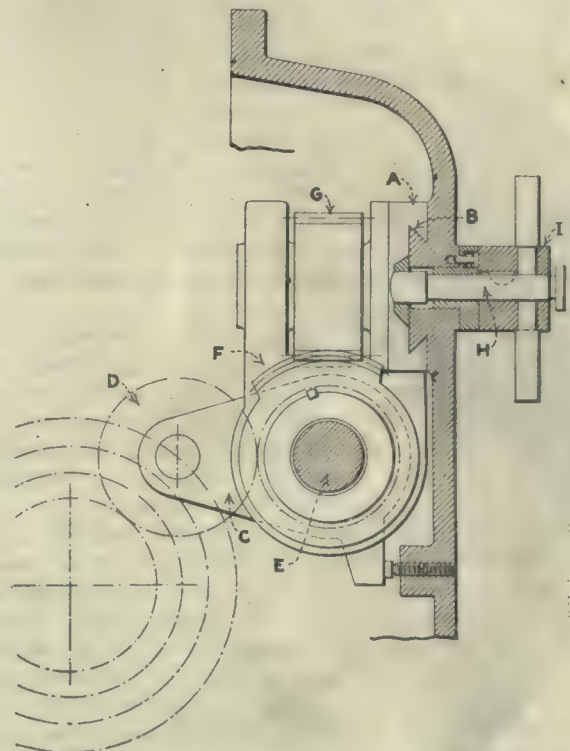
SUCCESSFUL SHIFTING DEVICE FOR HEAVY-DUTY MILLING MACHINE
